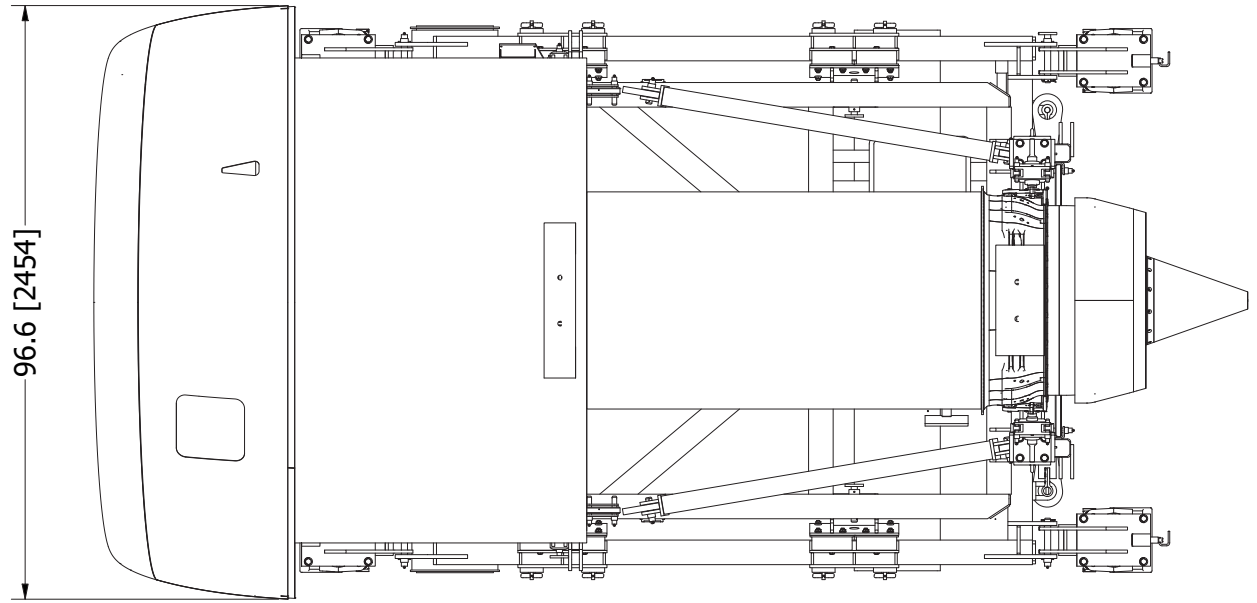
Dimensions of AGSE-E240-G01 with QEC Engine
